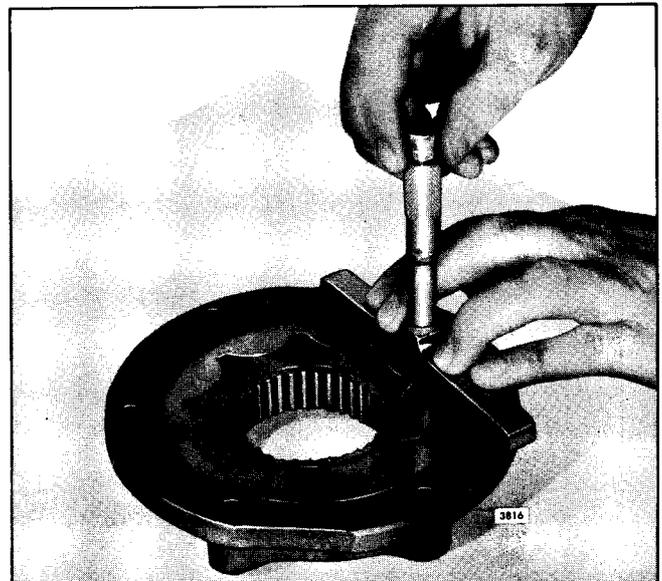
Measuring Clearance from Face of Pump Body to Side of Rotor
